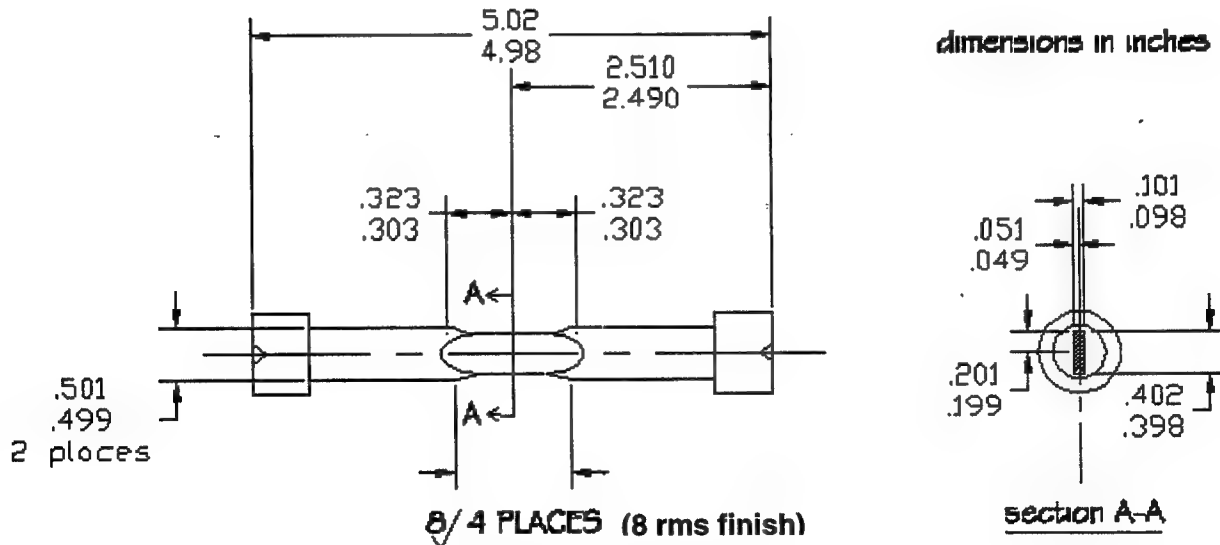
GEAE Kb BAR SPECIMEN DRAWING
